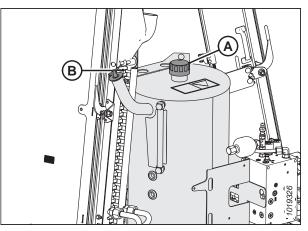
Hydraulic Oil Filler Neck and Breather Tube
